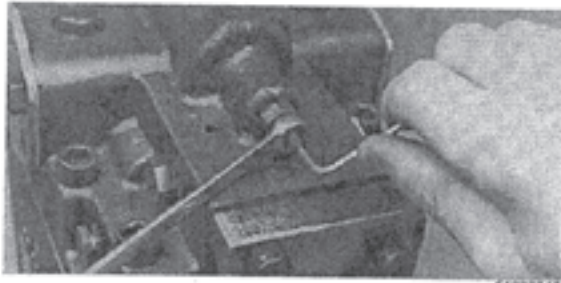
Adjusting Control Threshold (Type HP)
